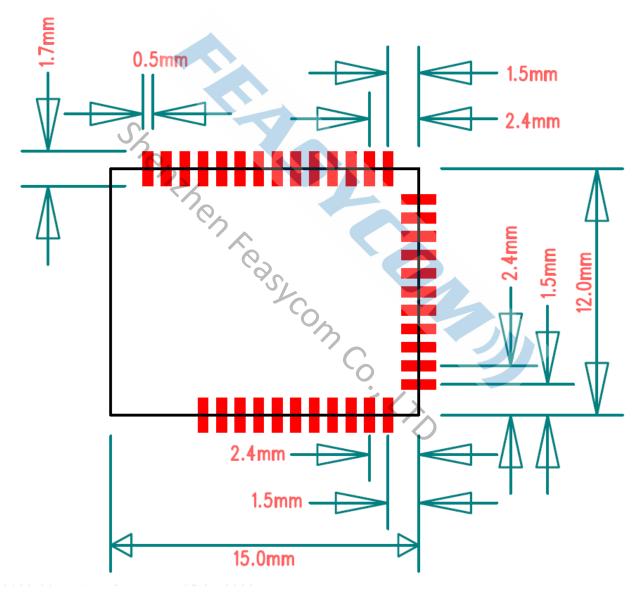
FSC-BT660 footprint Layout Guide (Top View)
